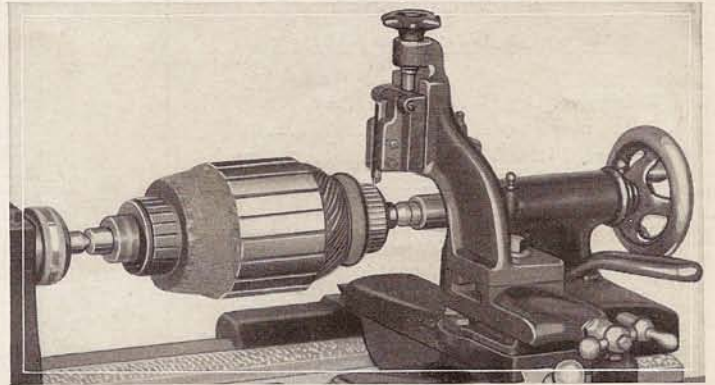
Undercutting Mica Insulation using Planer Type Mica Undercutting Attachment on No. 22 Junior Lathe
